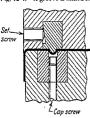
Draw head and mating groove machined from bar stock and recessed into die members.
